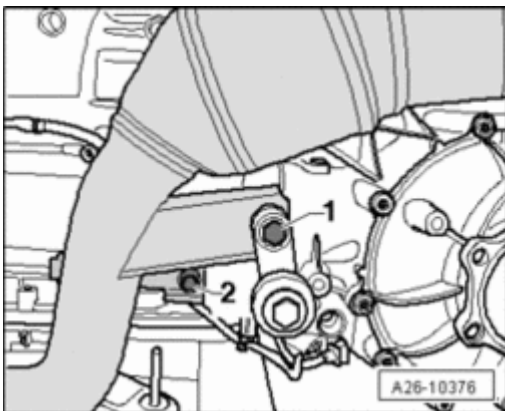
Removing Bolt On Bracket For Exhaust Pipe & Heat Shield
